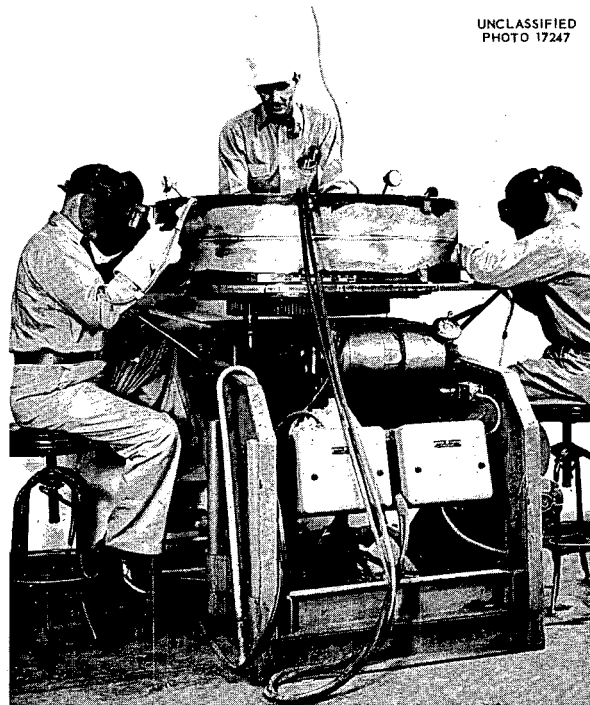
Weld-Shrinkage Hoop Test.
